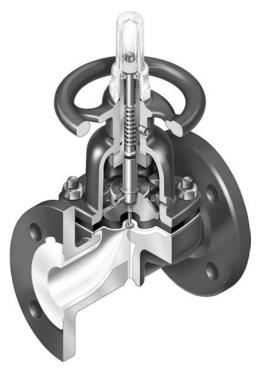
Diaphragm valve. (*Courtesy of ITT Engineered Valves*)
